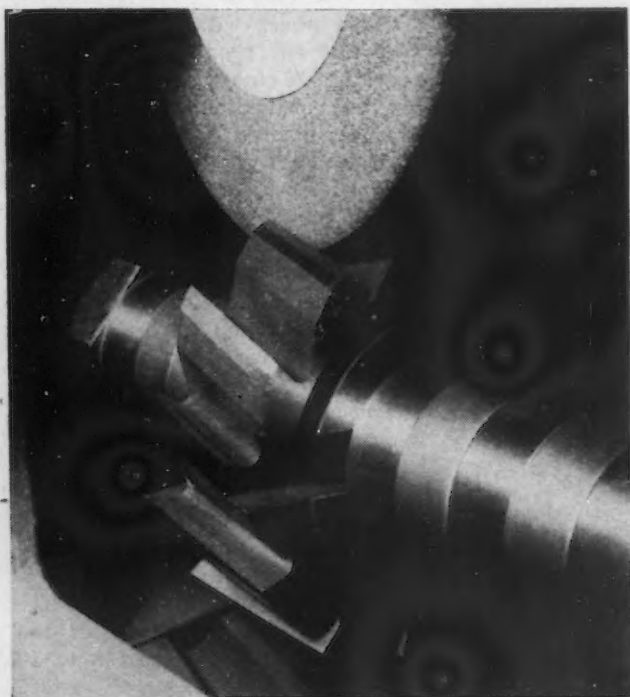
Back-off grinding of the tooth with a formed type of resinoid bonded wheel. Ordinarily, this is a milling operation on the annealed cutter blank.
